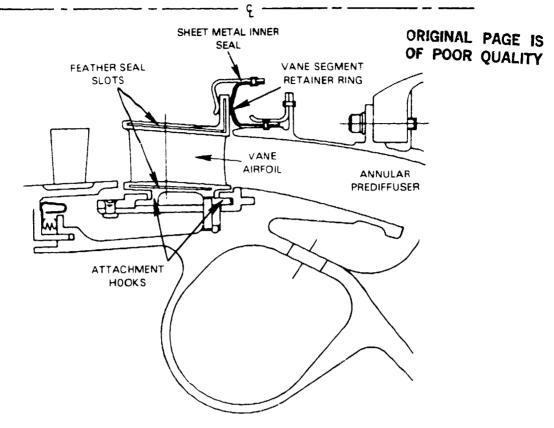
High-Pressure Compressor Exit Guide Vane Assembly
